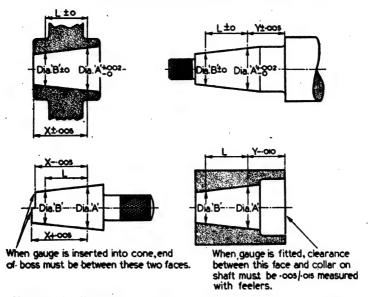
An Example of Dimensioning and Gauging of a Taper
